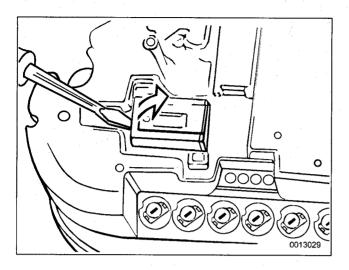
Remove coding plug retainer with a screwdriver (arrow).
